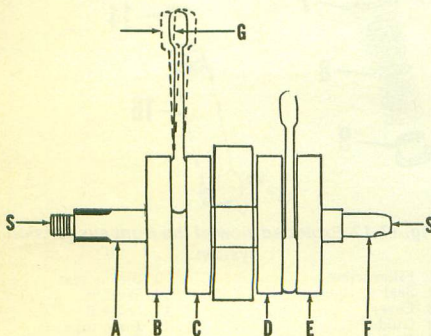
Refer to text for checking crankshaft for correct assembly or wear.
